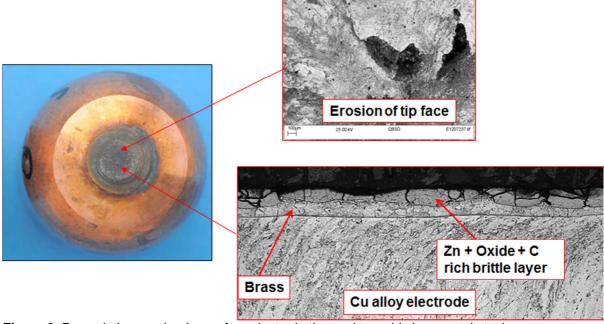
Degradation mechanisms of an electrode tip used to weld zinc coated steel
